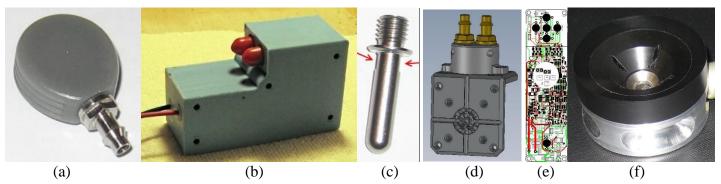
Prosthesis components: (a) proximal port snap housing, (b) molded pump housing, (c) distal liner pin with wrench flats (see red arrows) for ease of installation, (d) vacuum manifold, (e) electronic control board and (f) lock housing.
